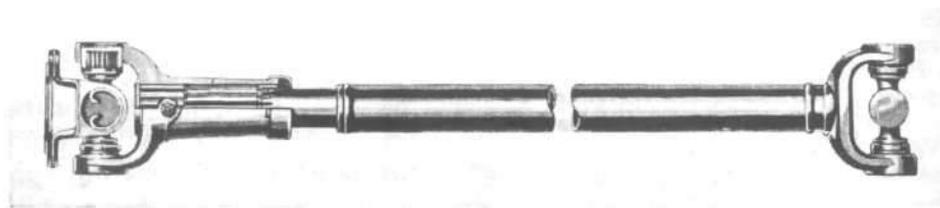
PROPELLER SHAFT AND UNIVERSAL JOINTS—NEEDLE BEARING TYPE
